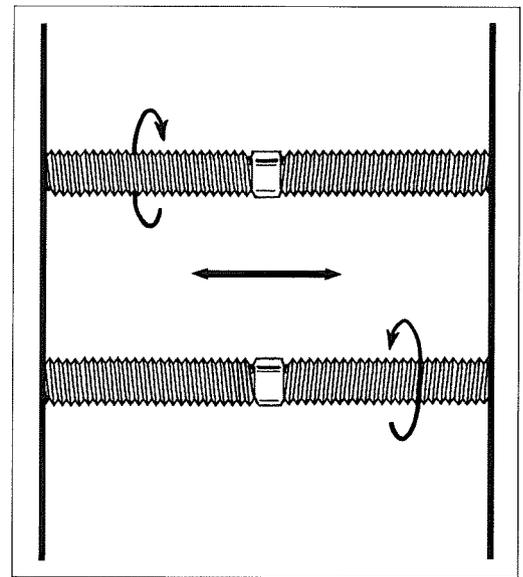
Handscrews use left- and right-handed threads on each spindle.
